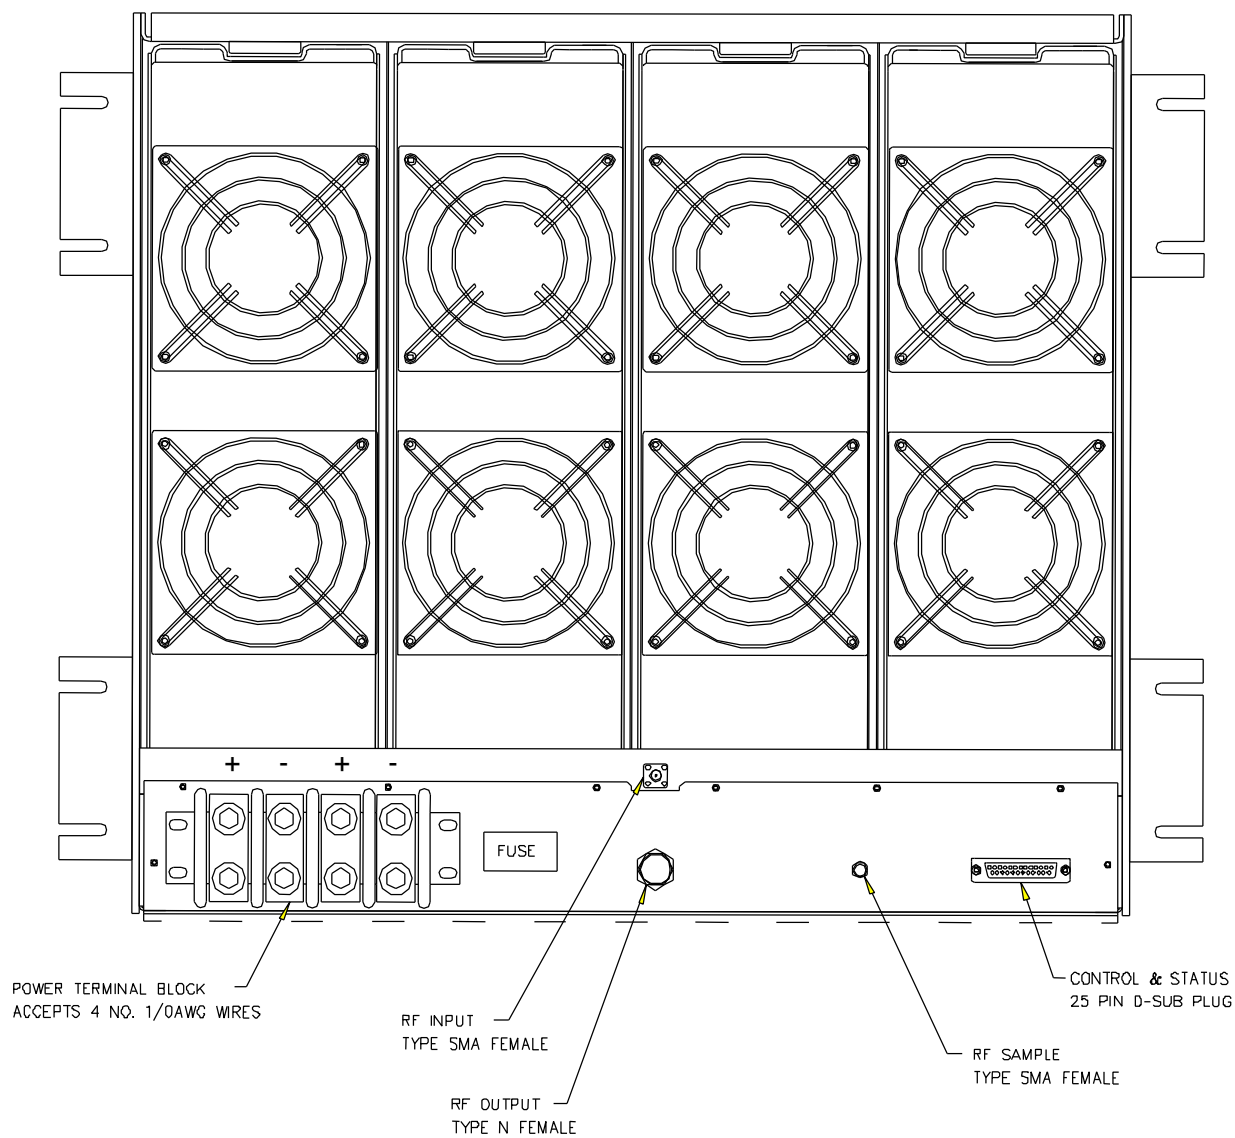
Model HPC8689-400 Back View of Combiner Shelf Assembly
